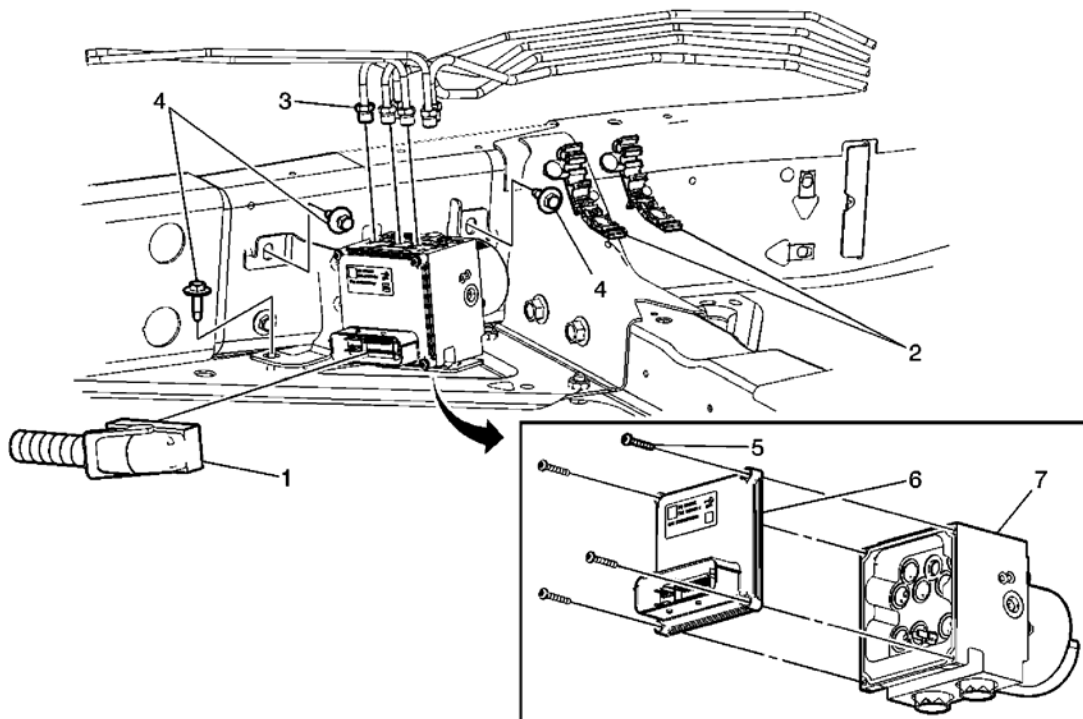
Identifying Brake Pressure Modulator Valve Components
